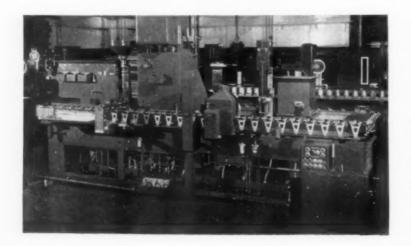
In-line type indexing machine for assembling distributor levers. It can be fitted with welding, riveting, machine attachments and automatic feeding devices for handling small parts. Inspection stations can be installed to make sure all parts are in place.
